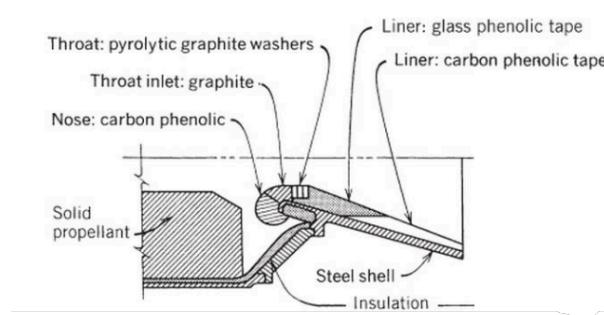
Ablative cooling on a solid rocket motor's nozzle and thrust chamber
